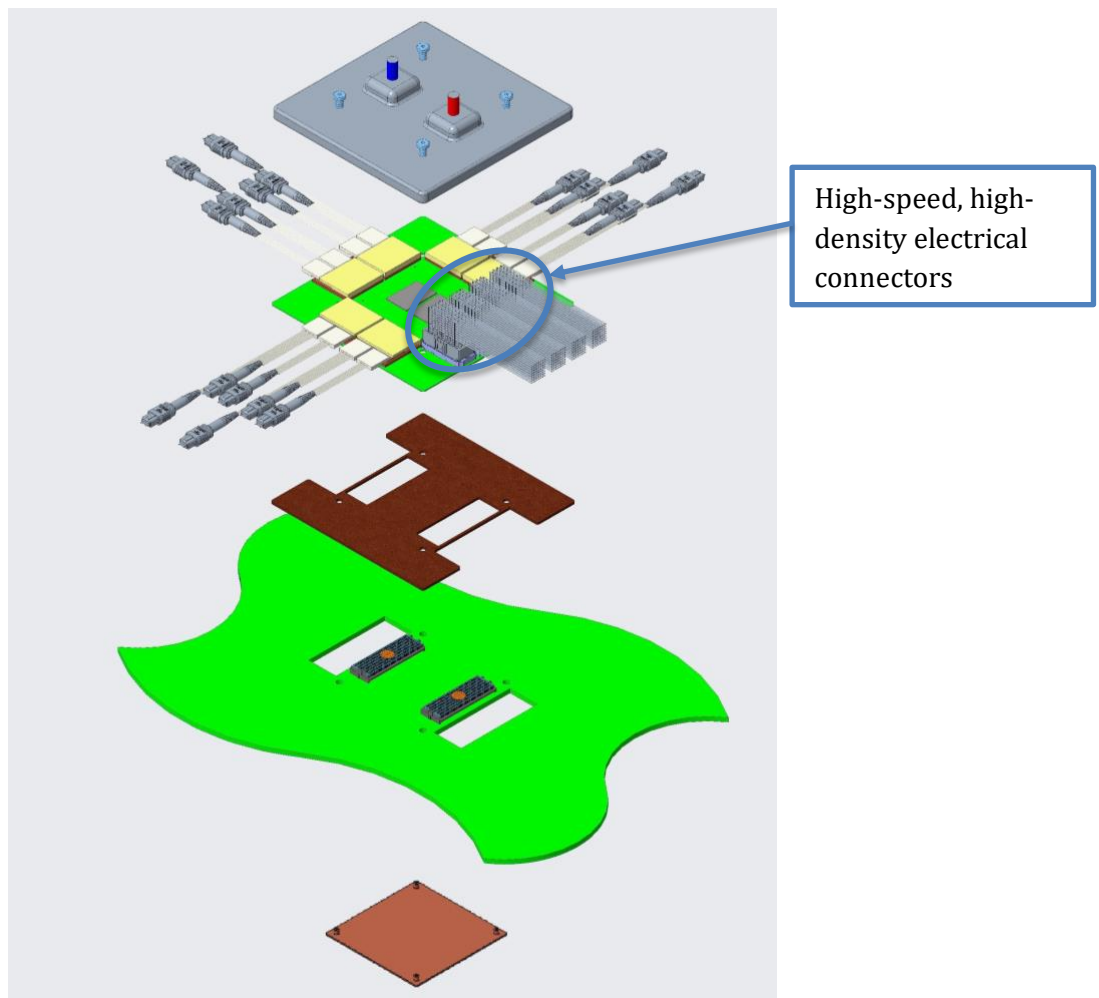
Exploded view of CPO assembly with optical and high-speed electrical connectors
